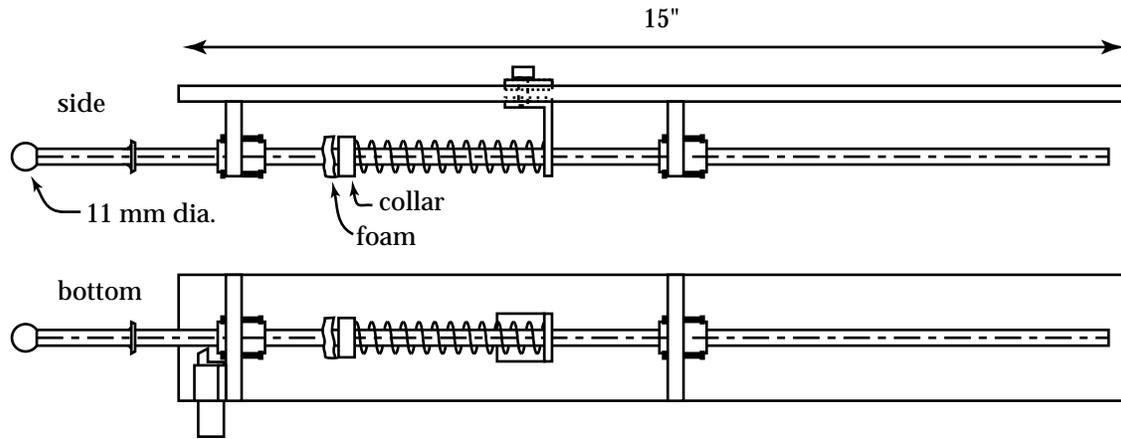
The tapping device used for these experiments features linear ball bearings, a manually adjustable backstop, and a ball bearing at the taper tip.
